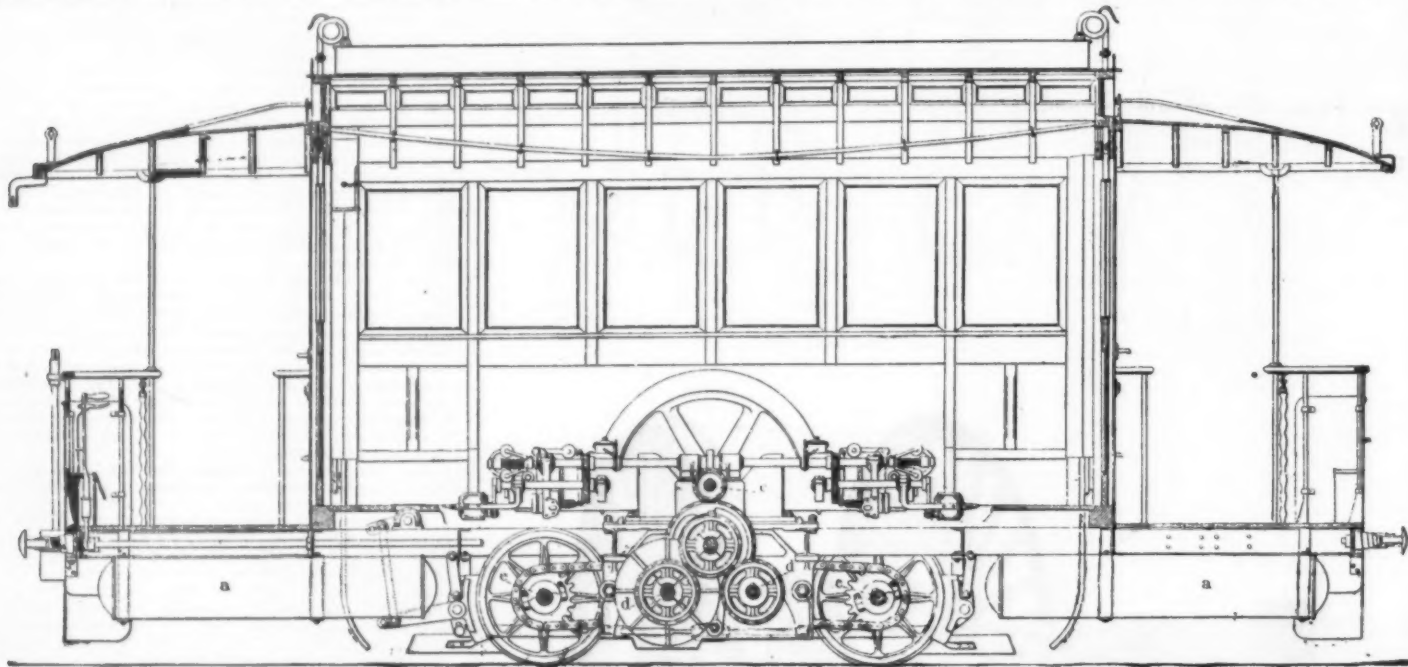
LATERAL ELEVATION—ARRANGEMENT OF THE MOTOR AND THE DRIVING GEAR OF THE WHEELS.
